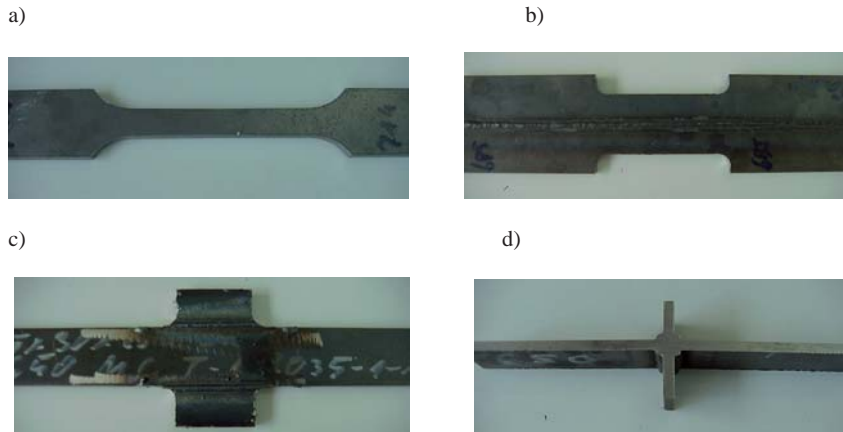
Test samples: a) uniform sample (type A), b) with a longitudinal weld (type B), c) with longitudinal welds (type C), d) cross joint (type D)
